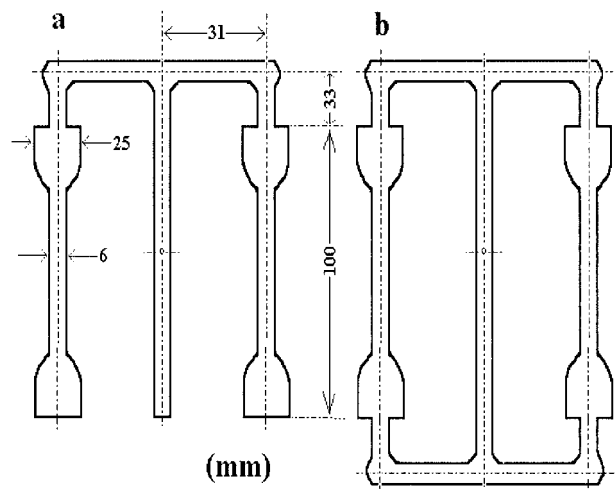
Schematic diagram of mold cavity used for injection molded samples with and without weld line: (a) no weld line, NWL; (b) with weld line, WL.
